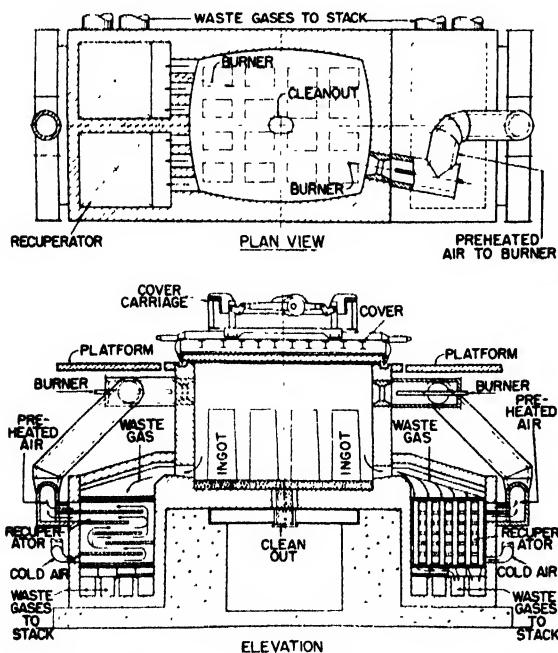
Diagrammatic elevation and plan view of a top two-way-fired soaking pit. Left-hand section of plan view is through waste gas ports; right-hand section through one of the burners. Left-hand half of elevation is section through air passages of recuperator; right-hand, through waste-gas passages. (Courtesy, Amsler-Morton Company.)
